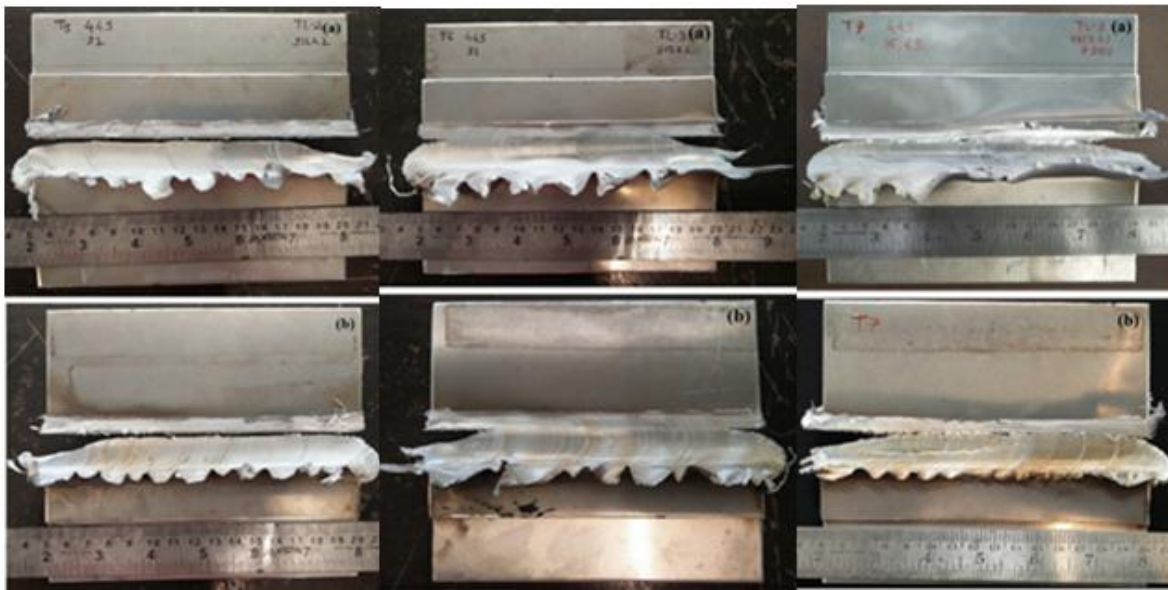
(left) Weld formation in experiment-9, (a) Top surface, (b) Bottom surface; (middle) Weld formation in experiment-10, (a) Top surface, (b) Bottom surface; (right) Weld formation in experiment-11, (a) Top surface, (b) Bottom surface
